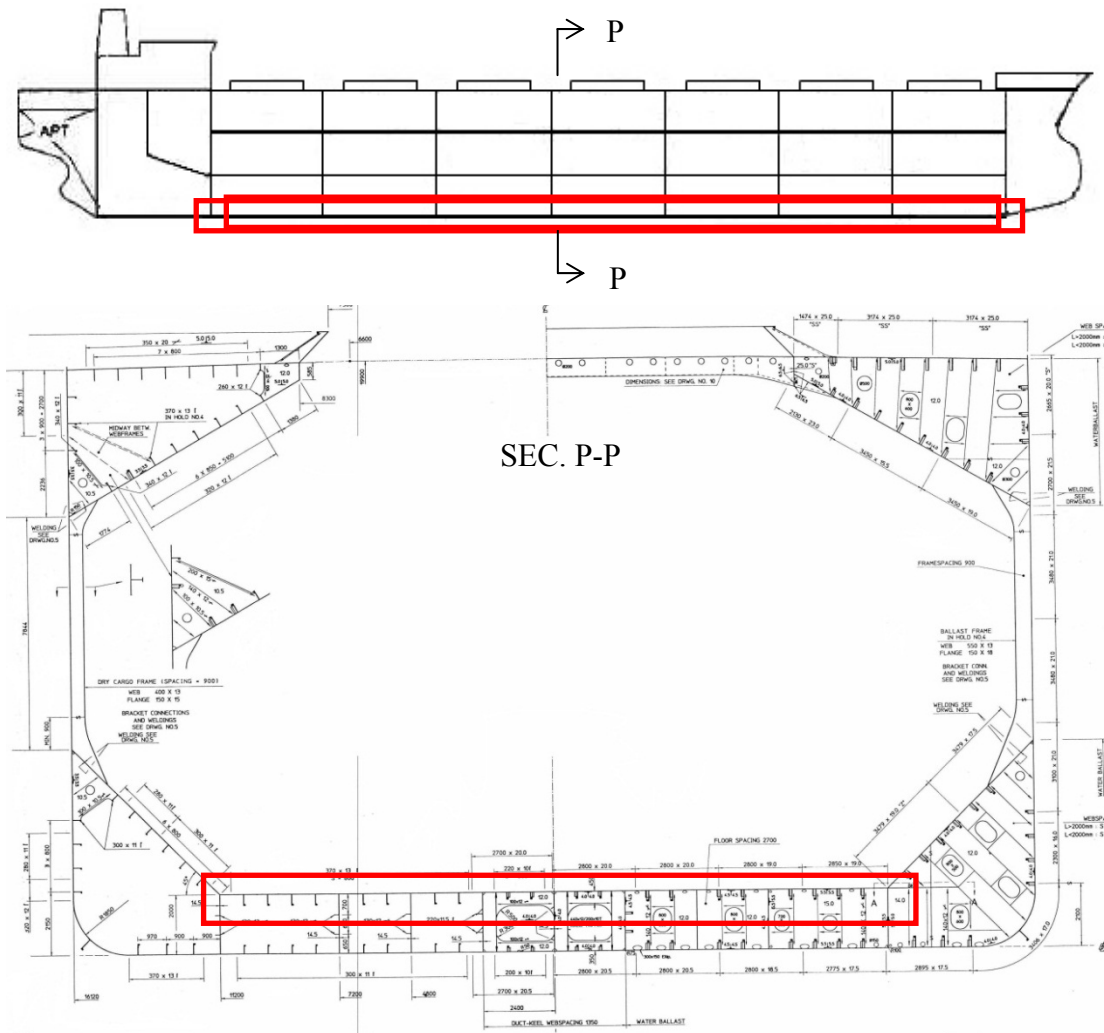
Situation II of Cracks at the Connections of Centre line/side Girder
